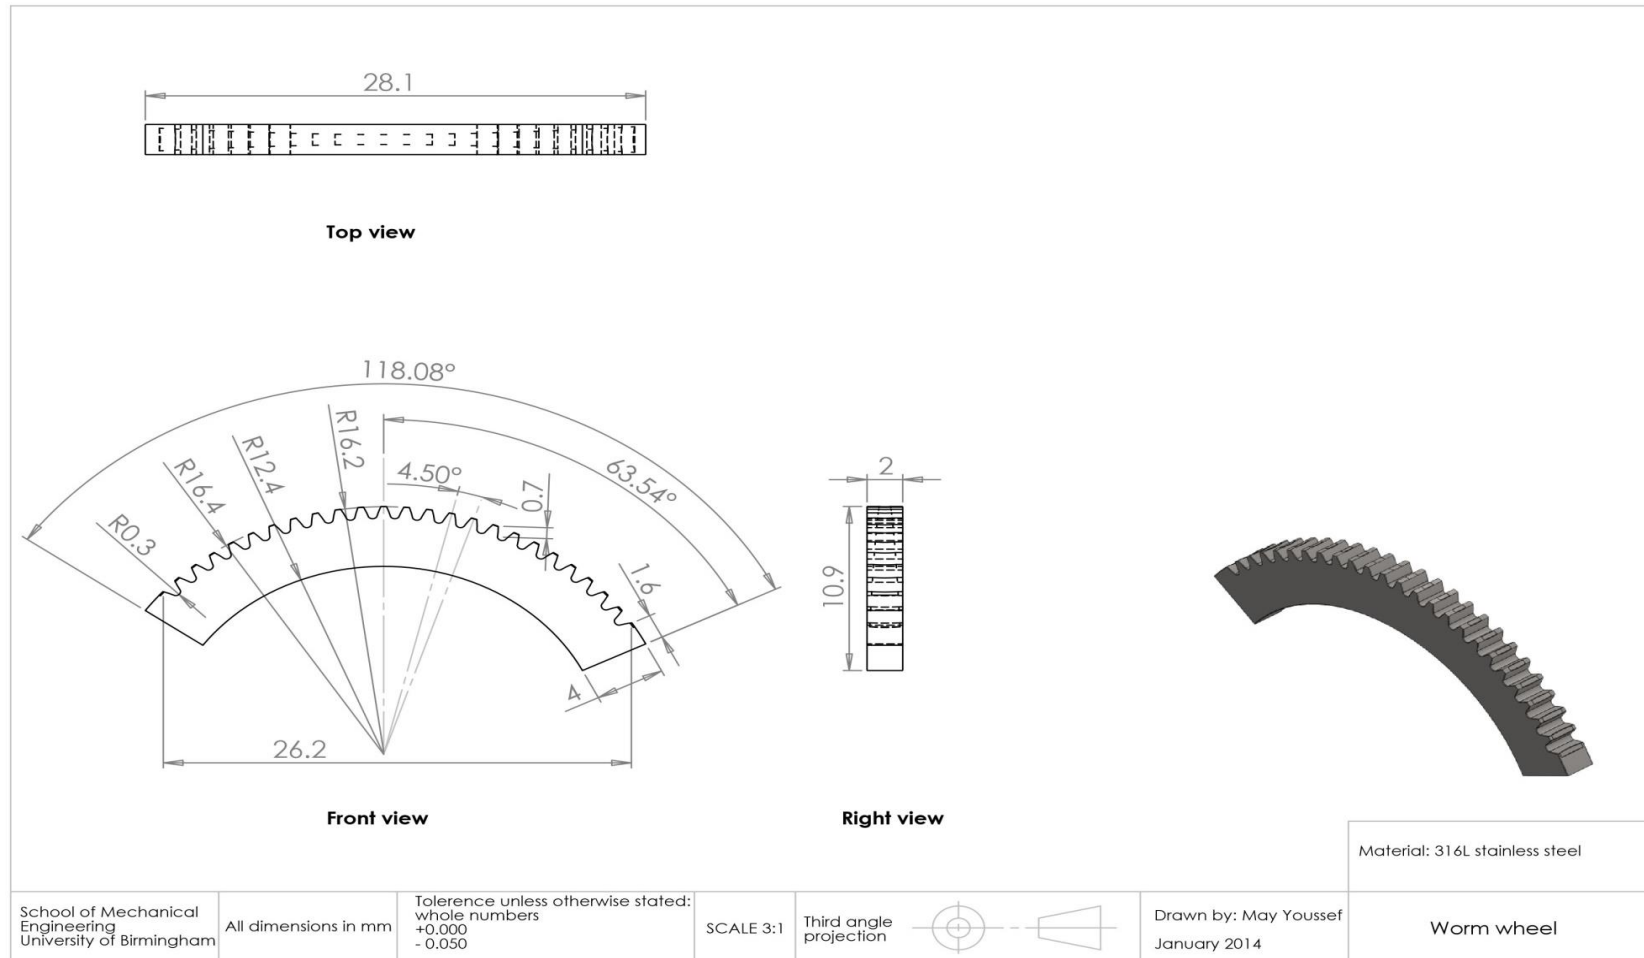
Engineering drawing of the worm wheel tooth profile.
